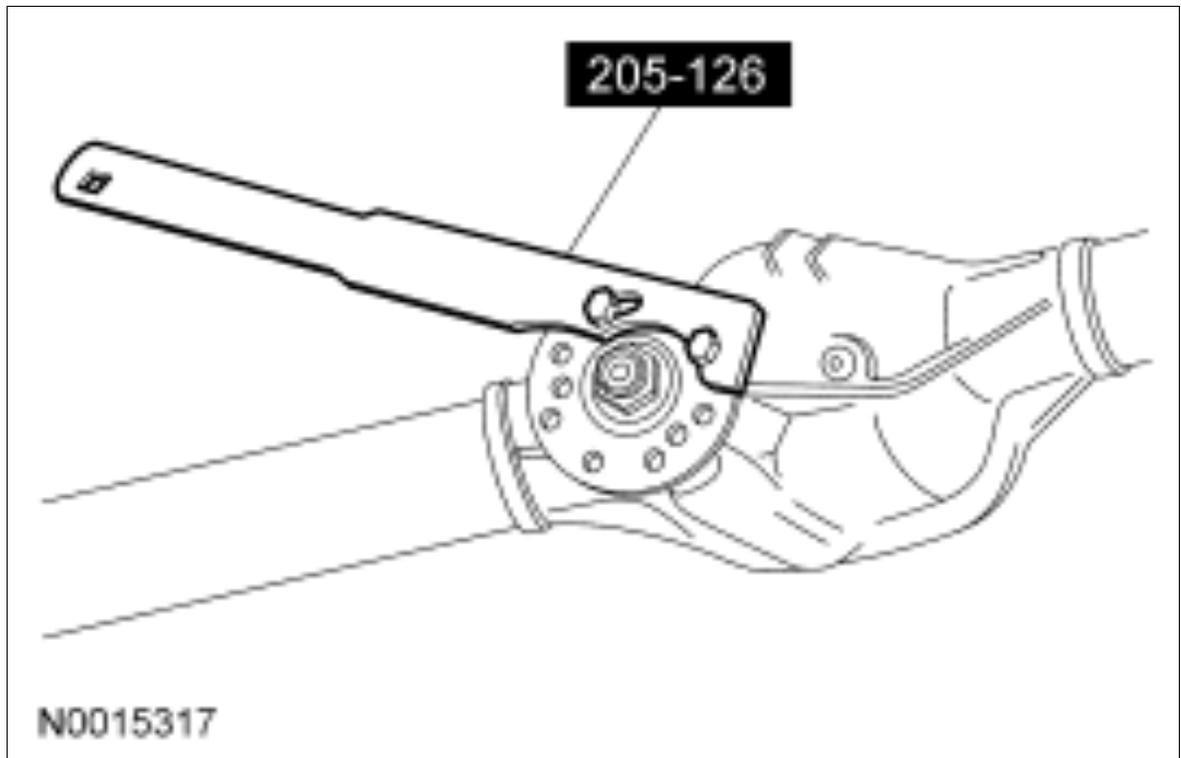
Disconnecting Driveshaft Flange Yoke From Pinion Flange
